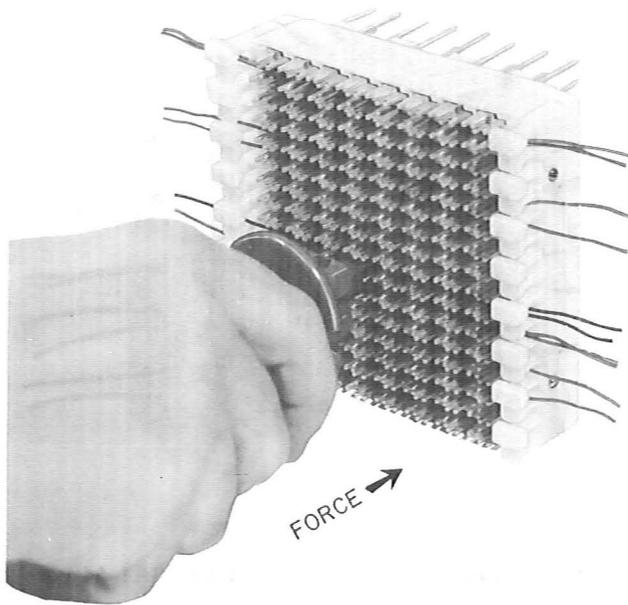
Use of 756B2 Tool With 78B1-64 Block
